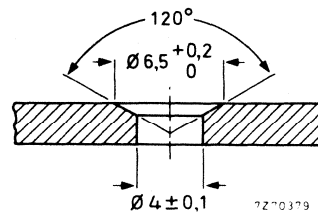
Shape of hole for 500 V insulation, nut fastening.
